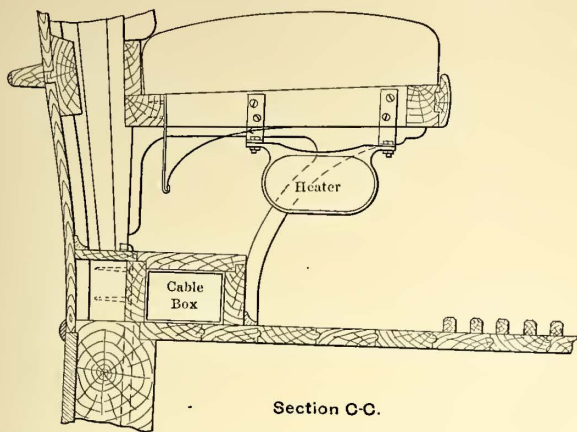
DETAIL OF SEAT, HEATER AND CABLE BOX, WASHINGTON CAR
